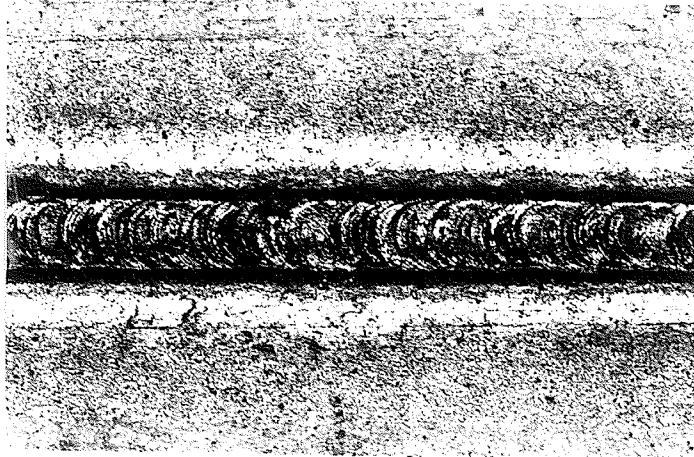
The surface appearance of a LAMPS welded
